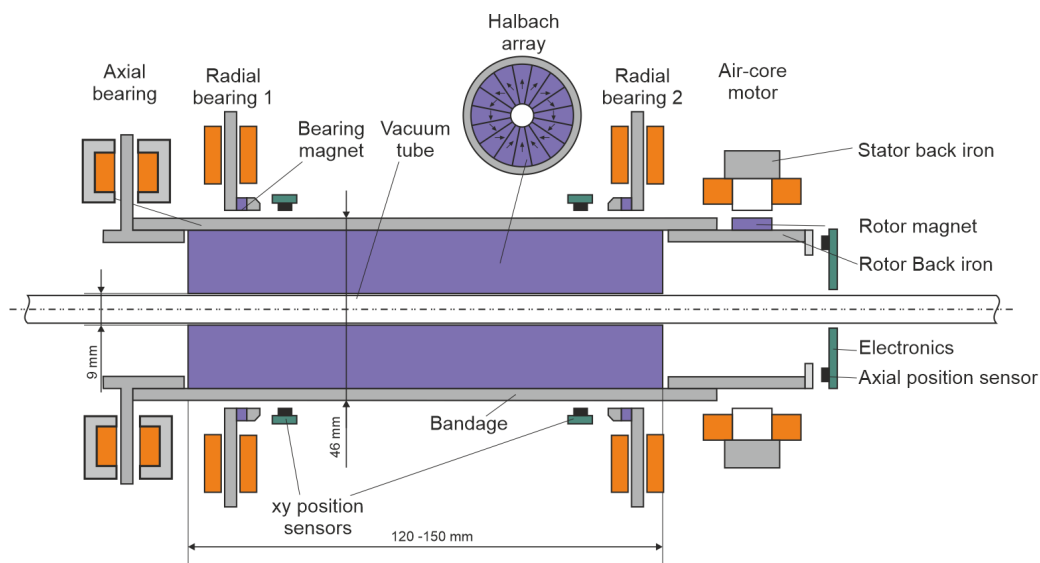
Cross-section of the proposed magnetic bearing assembly
